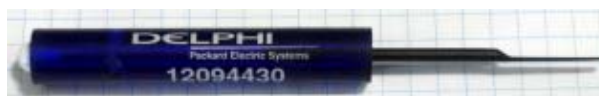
EXTRACTOR DELPHI 12094430
